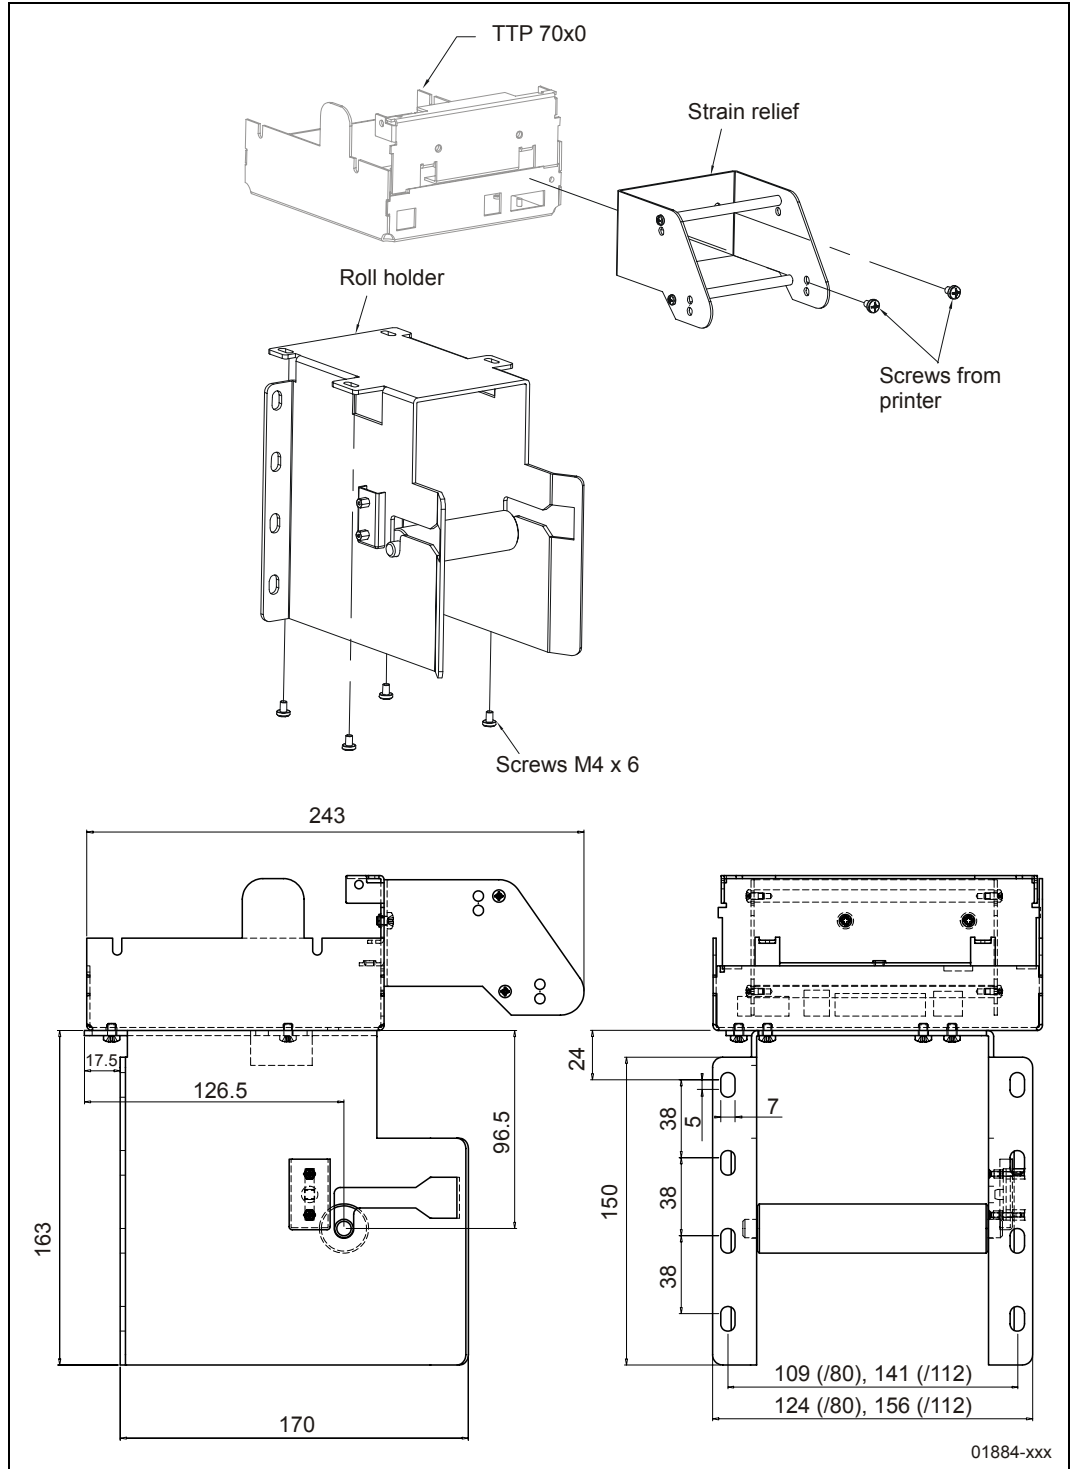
Roll holder 01884-080 and 01884-112 for paper placed under TTP 70x0.
